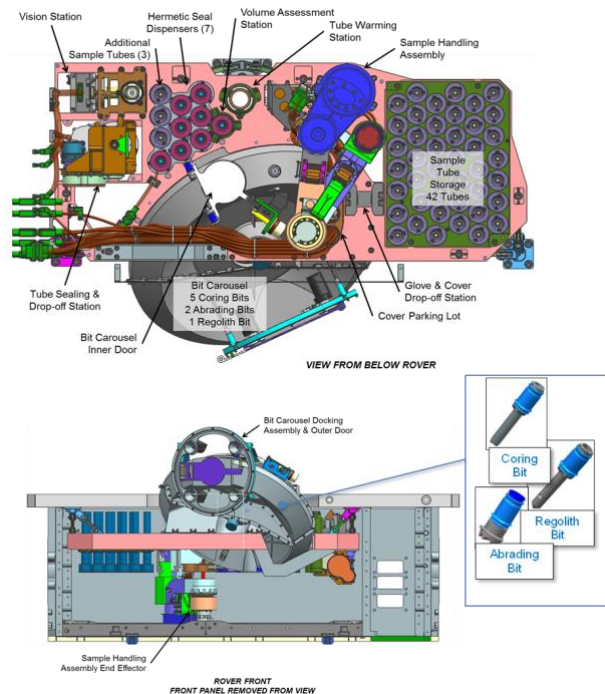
Mars 2020 Adaptive Caching Assembly detail
